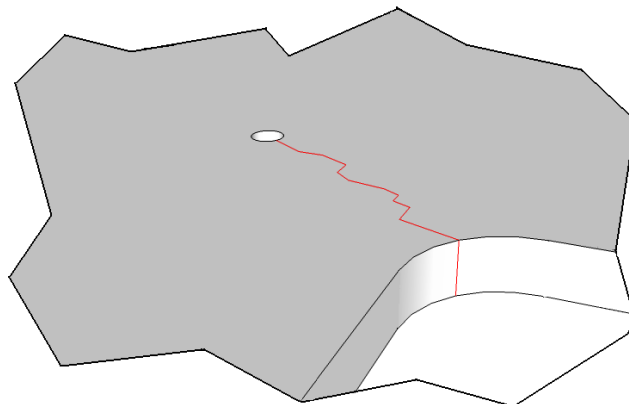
Drill stop at tip of fracture after location of tip is verified using NDT
